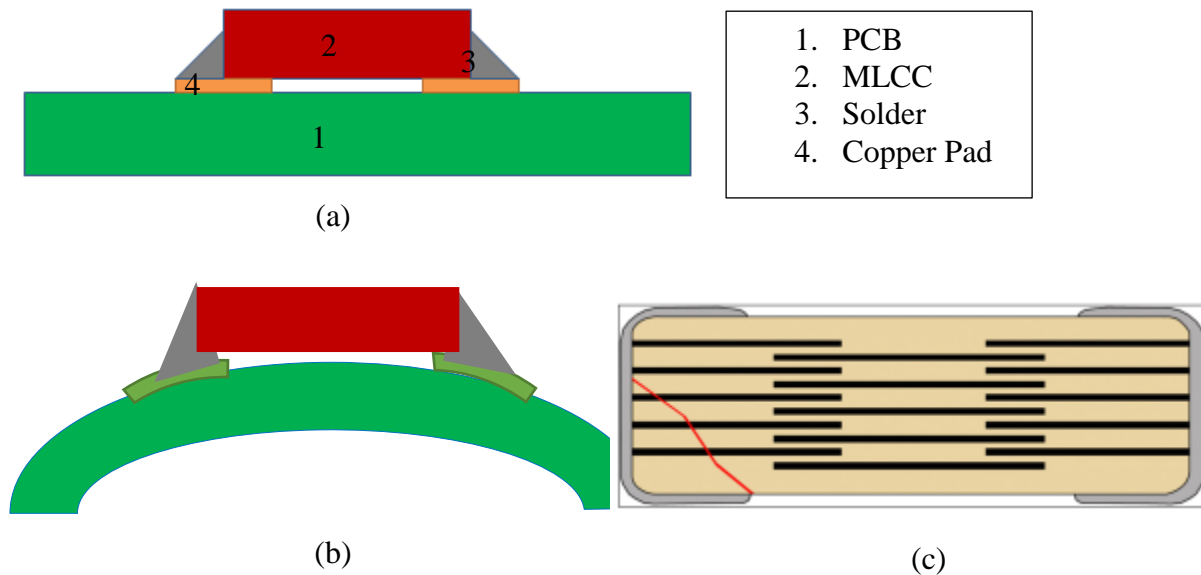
(a): Schematic of MLCC soldered onto the PCB. (b) Schematic showing bending of the PCB and possible deformation mode of other system components. (c) Observed Flex cracking in Capacitor due to bending of the integrated system. [6]
